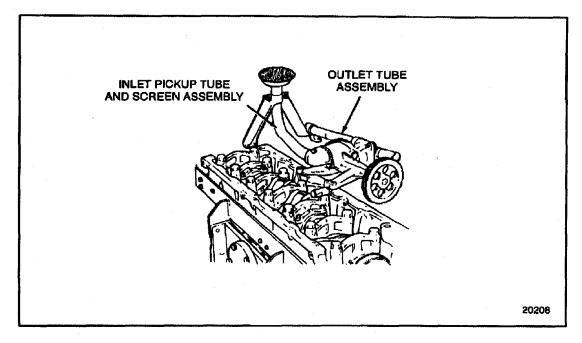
Oil Pump Removal (Pre-1991 Engines)
